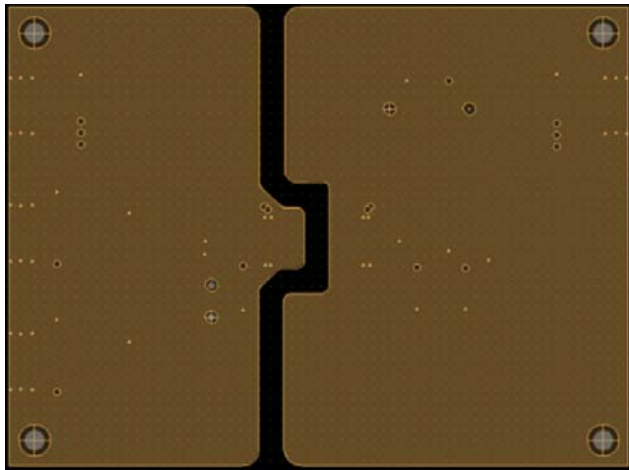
Gap Board Layout of ADuM1xxx with 4 mm Gap Showing GND Layer 2
